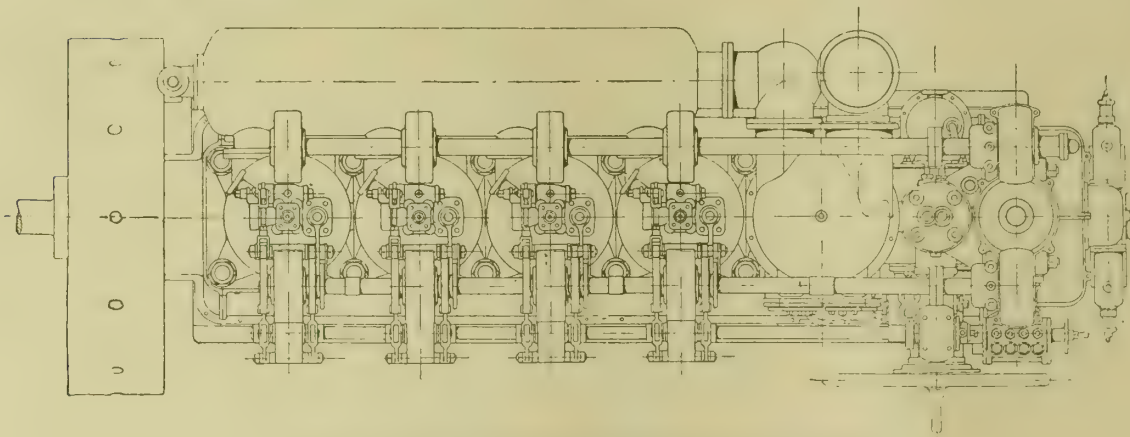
SULZER REVERSIBLE TWO-STROKE 400 B.H.P. OIL ENGINE.
